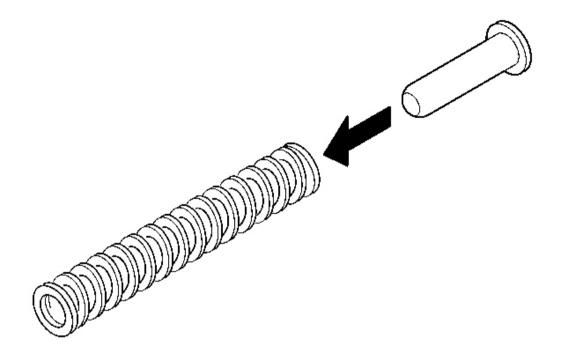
Installing Spring Guide To Tilt Spring Courtesy of GENERAL MOTORS CORP.
